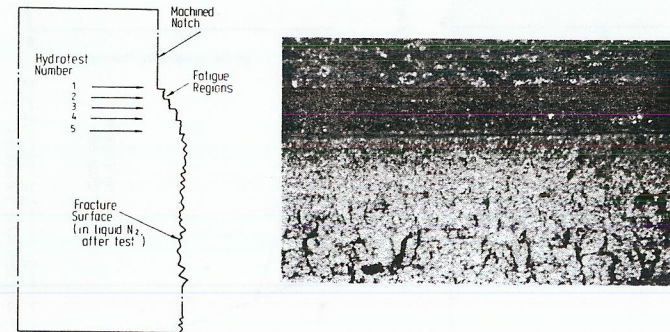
FRACTURE SURFACE OF MACHINED DEFECT SHOWING CRACK GROWTH
